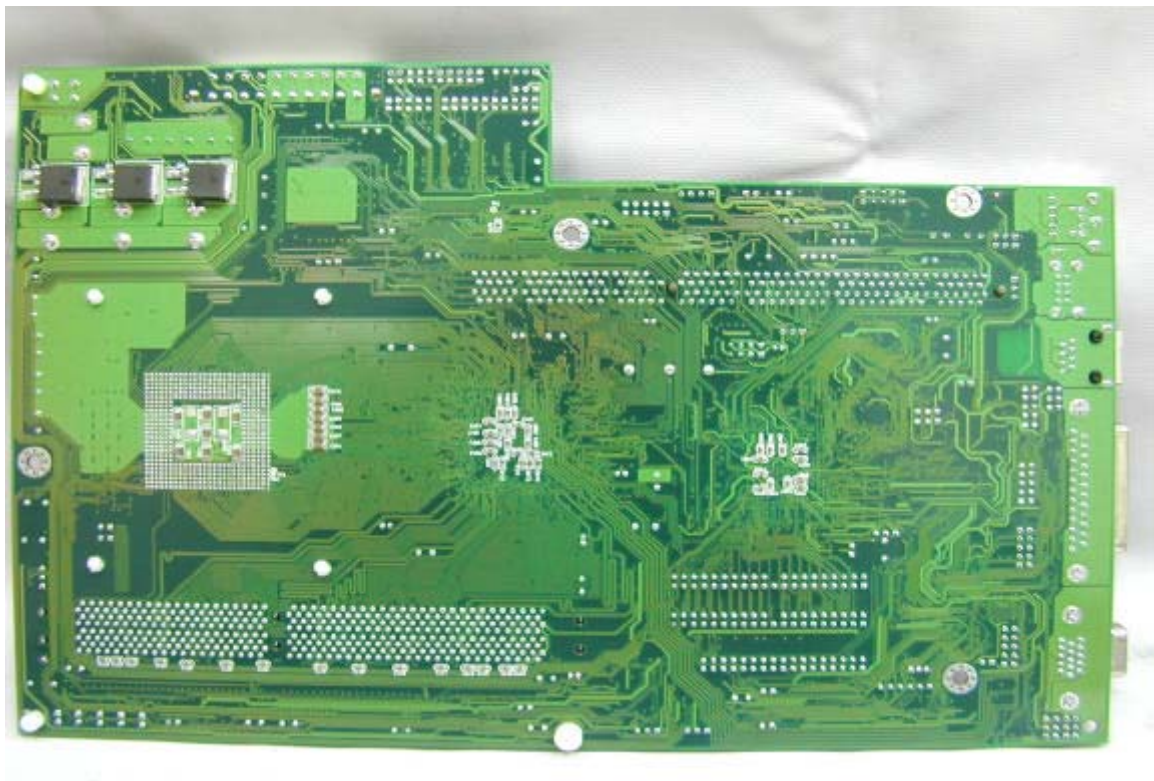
EUT I/O PORT VIEW (MAIN BOARD)
